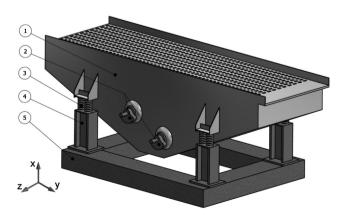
Shake out conveyor - factory setup (SSVI).
